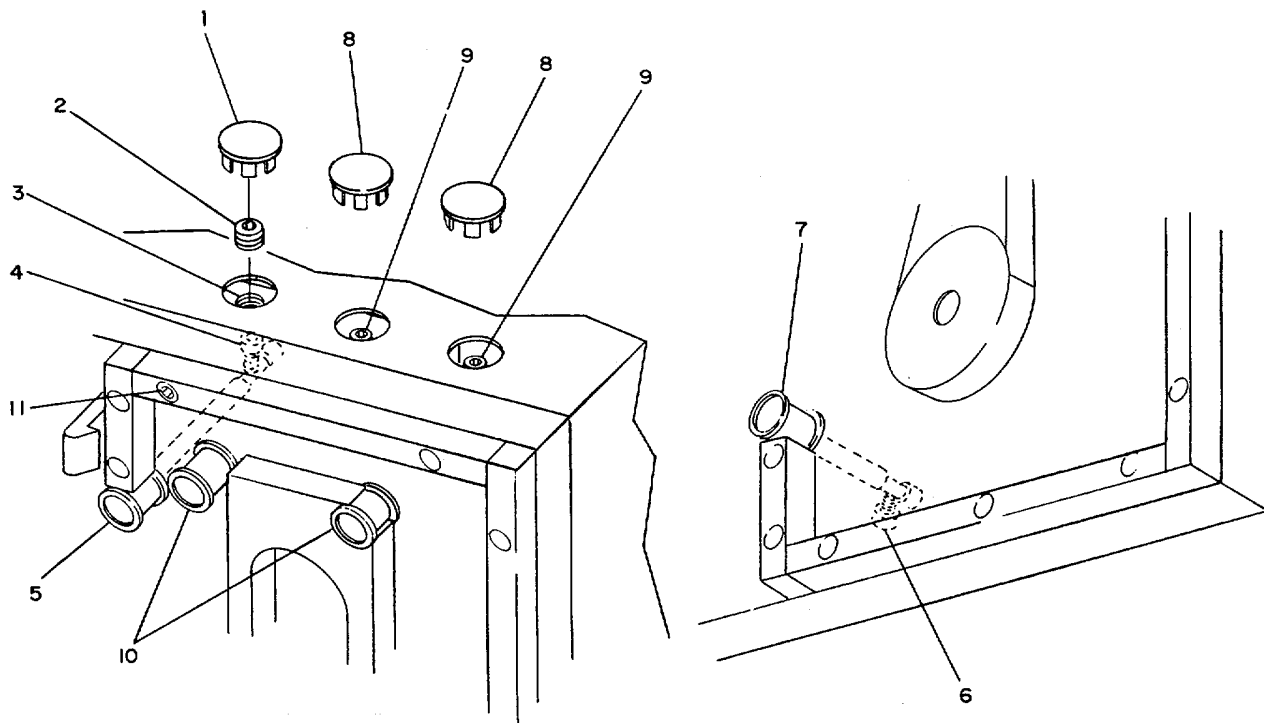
Tach and Tach Rollers, Locking Screw Locations
